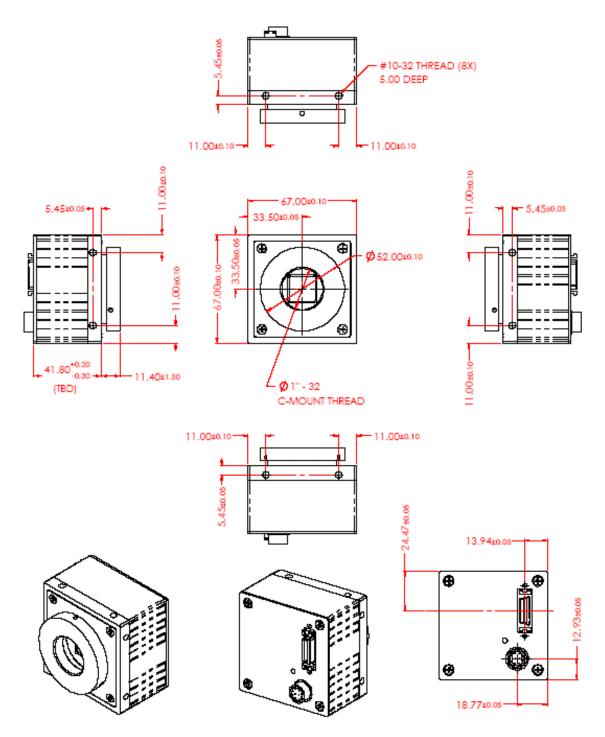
IPX-1M48-L Dimensional Drawings
